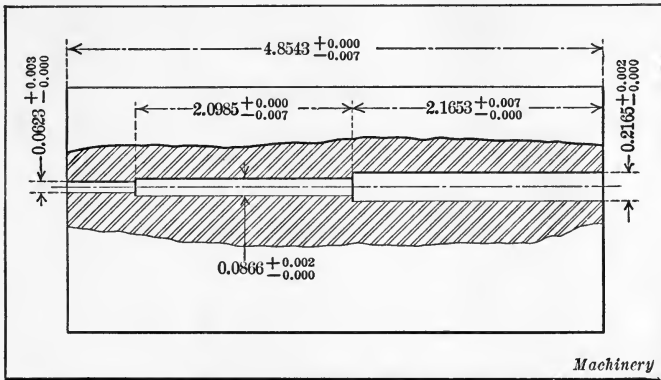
Gun Part drilled in Machine shown in Fig. 6
